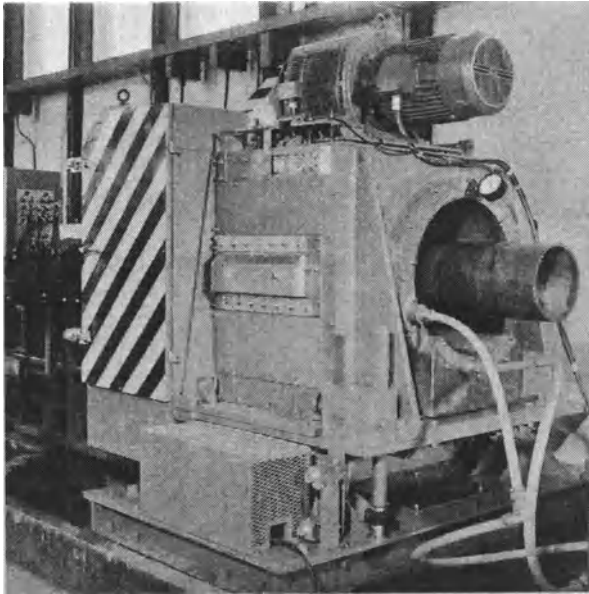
Rotating probe tube-testing installation with sliding probes
